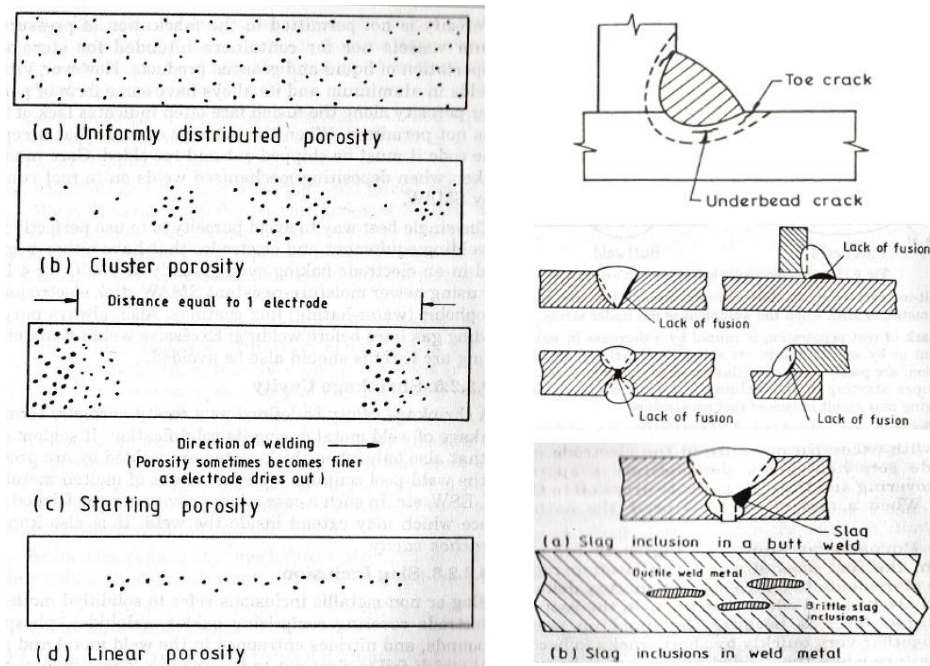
Typical examples of sub-surface weld defects [50]
